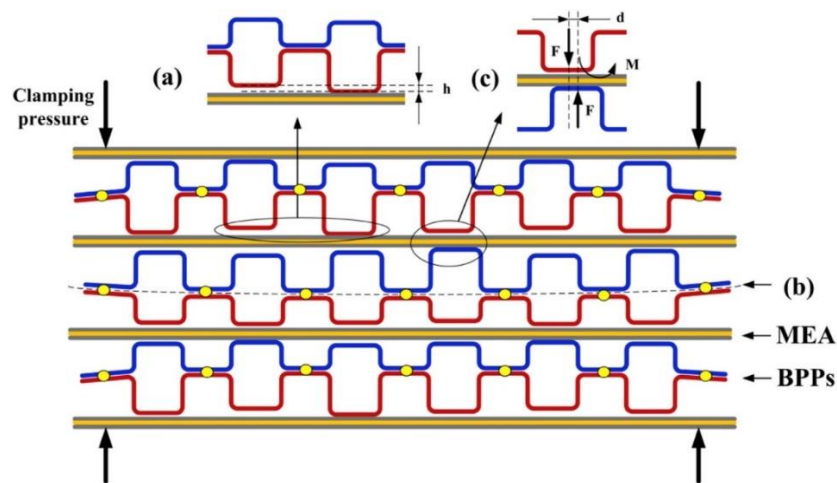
Schematic of PEM fuel cell stack metallic BPPs' (a) dimensional error; (b) shape error; and (c) assembly error [378]
